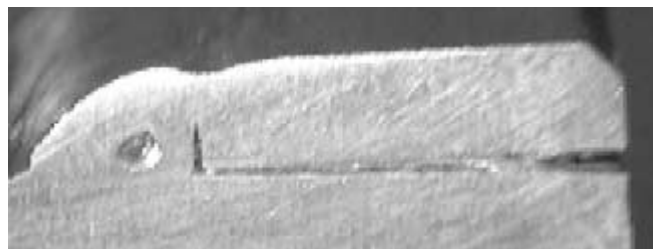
Lack of fusion in Fabricator C's fillet weld
